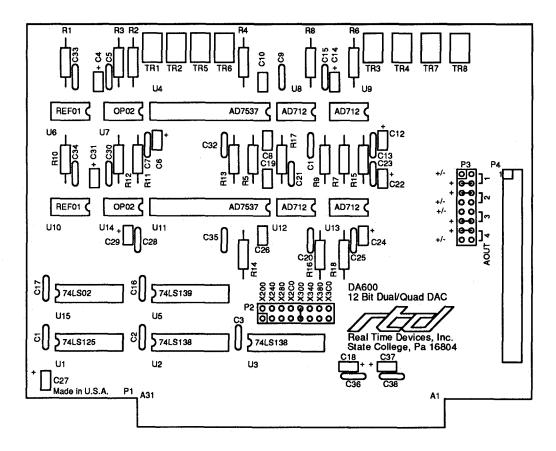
Board Layout Showing Factory-Configured Settings
